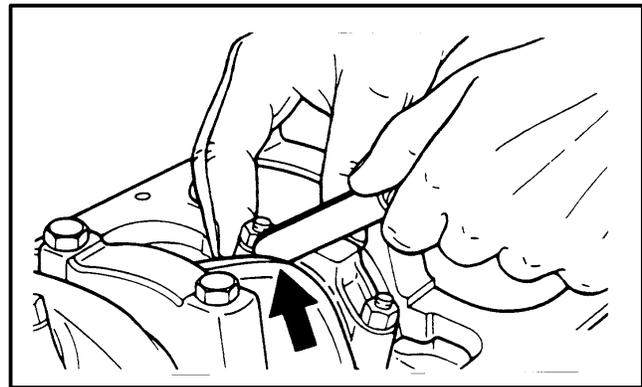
MEASURE THE SIDE CLEARANCE, CONNECTING RODS
